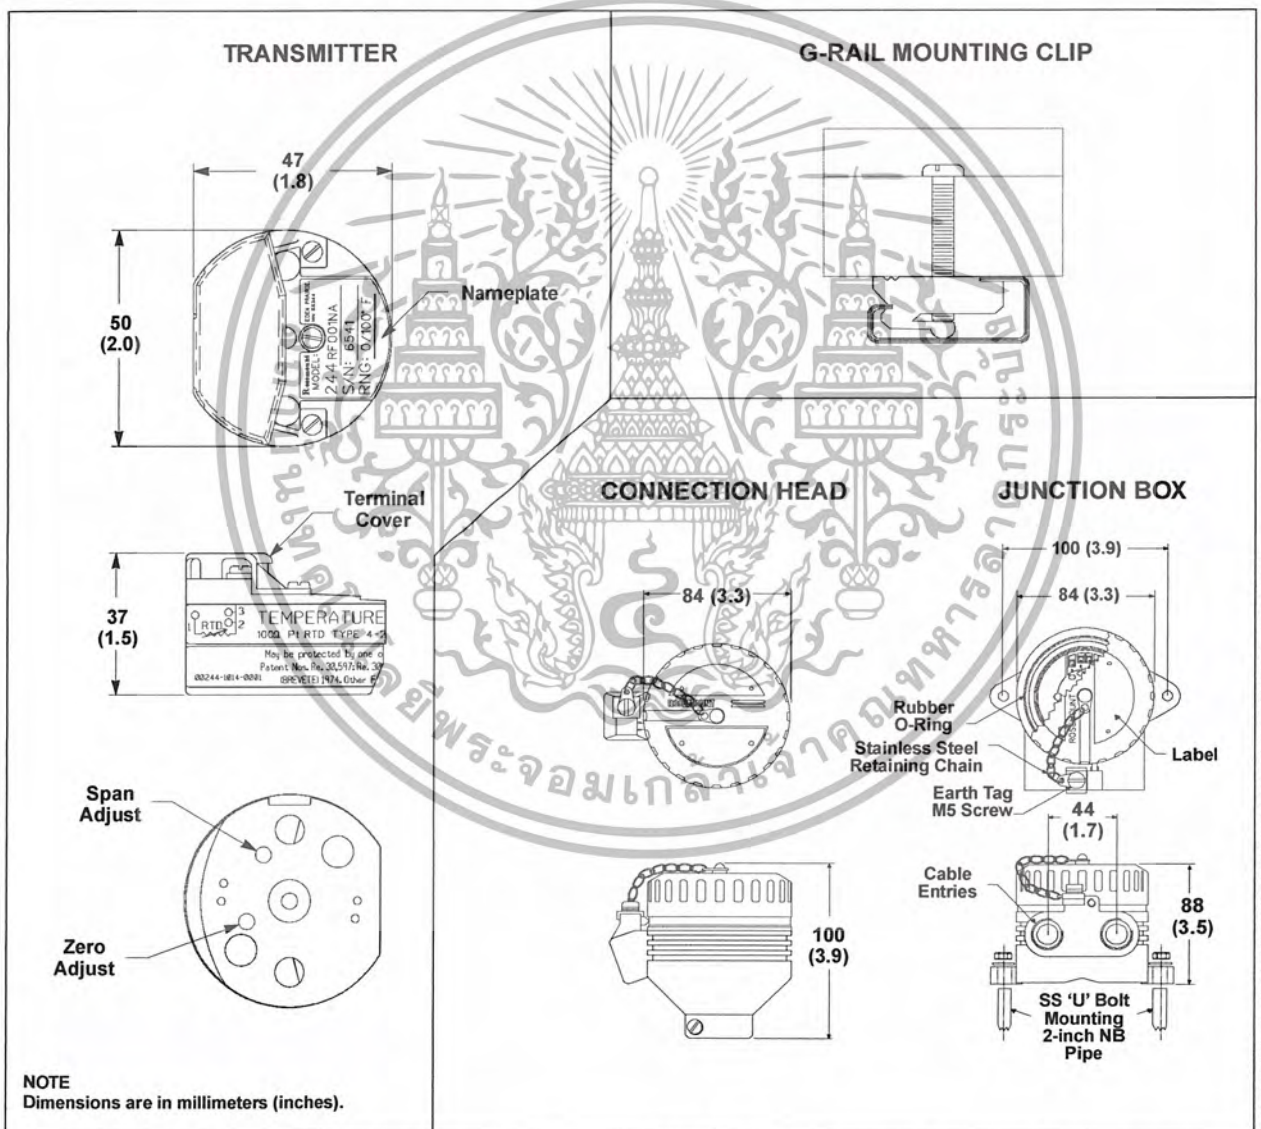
Model 244R Temperature Transmitter and Mounting Accessories Dimensional Drawings.
